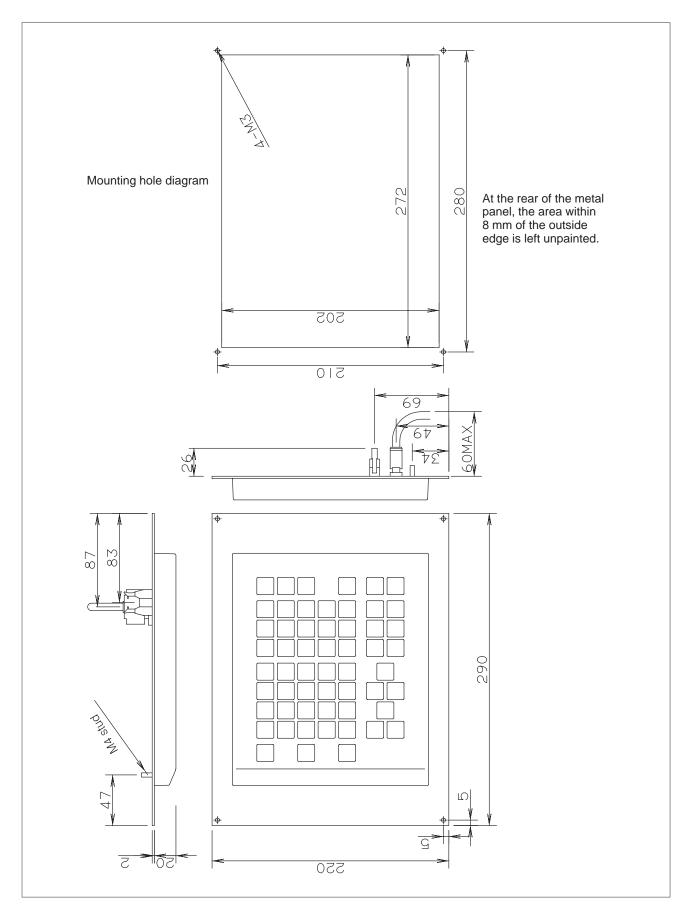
(a) External dimensions of separate-type standard MDI unit (vertical type)
